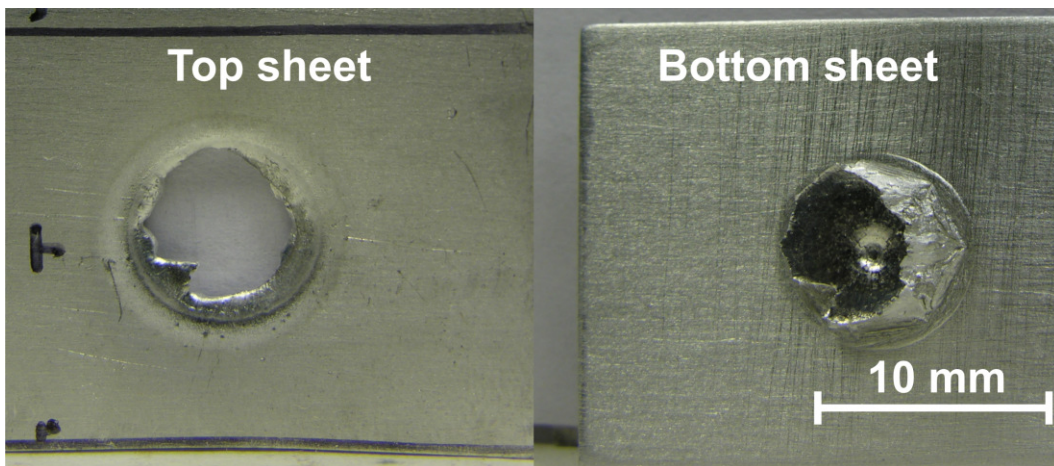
Button pullout mode fracture in a DSA spot weld nugget produced with a 2.8 kW welding power and 1 second weld time.
